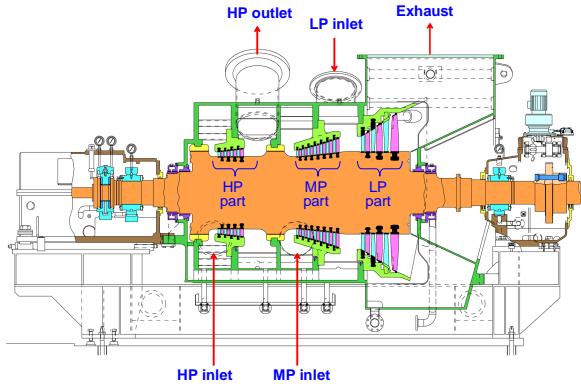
Sectional drawing of Svartsengi Unit 6 turbine.
